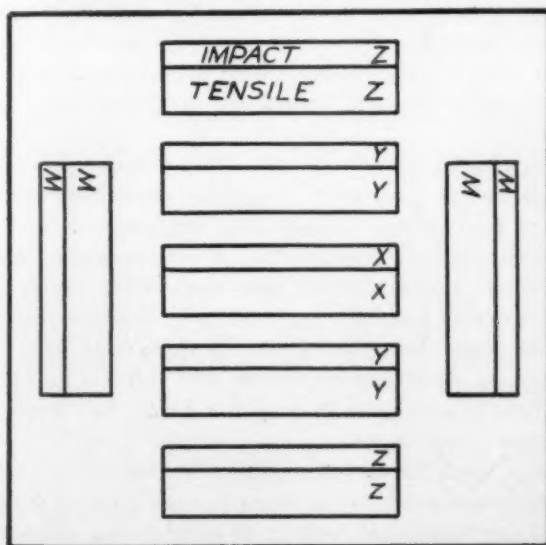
POSITION OF TRANSVERSE, TENSILE AND IMPACT SPECIMENS REMOVED FROM 1 1/4-IN. SECTION B SHOWN IN FIG. 4.
